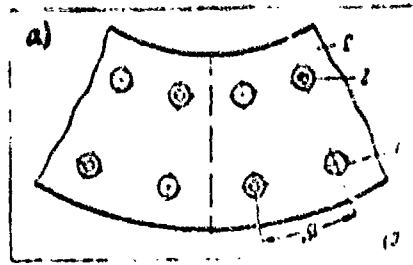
Fastening the friction liners of the clutch driven disk with rivets:
